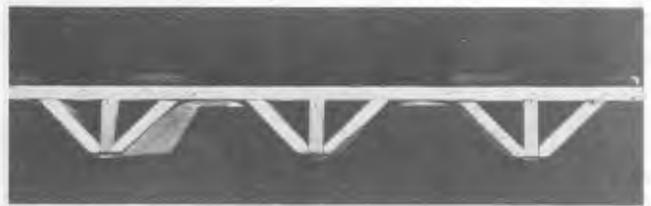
Note trailing edge of sheet metal shaped in an arc to form rounded ridge tops.
